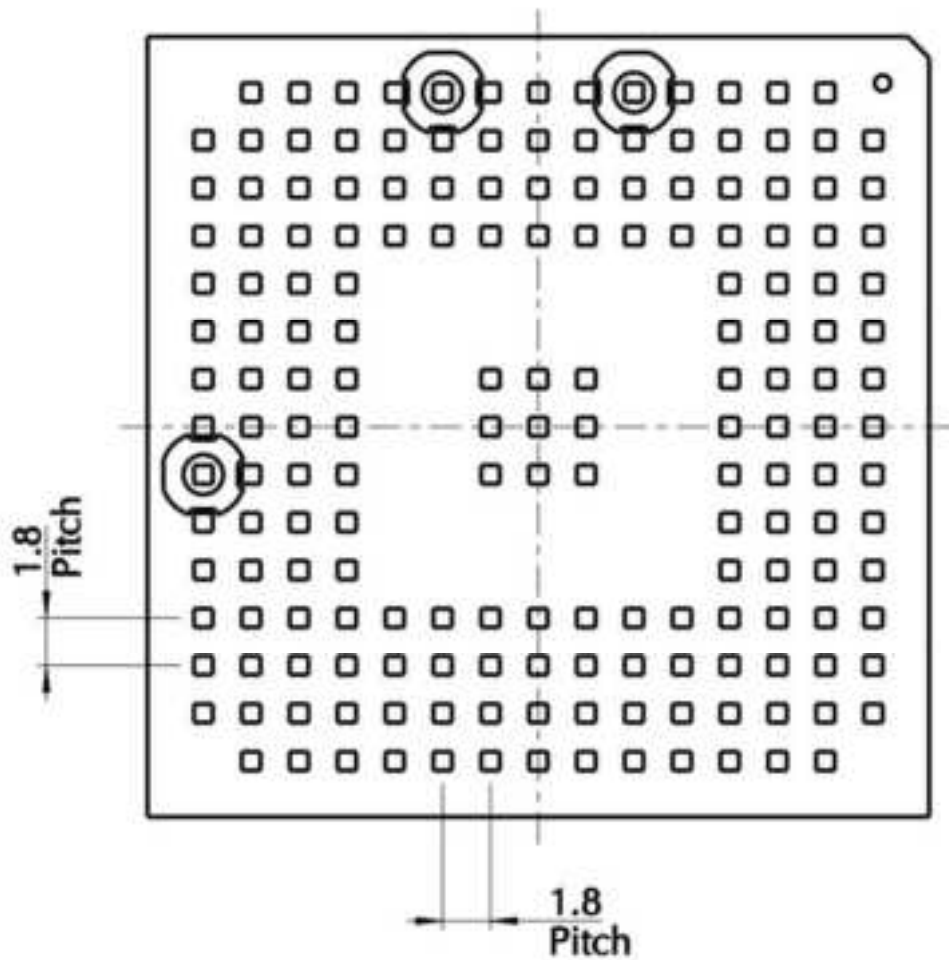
LE910Cx-WWX Mechanical Dimensions (Bottom View)
